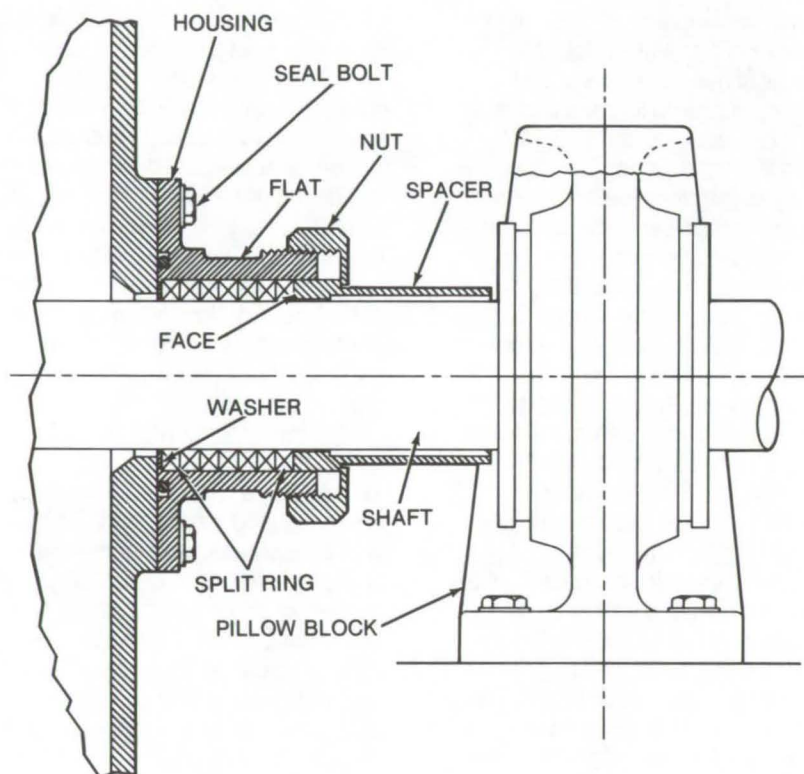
When the Split-Ring Seal nut is torqued down, the ring is compressed against the washer, the spacer face, the shaft outside diameter, and inside diameter of the housing.
